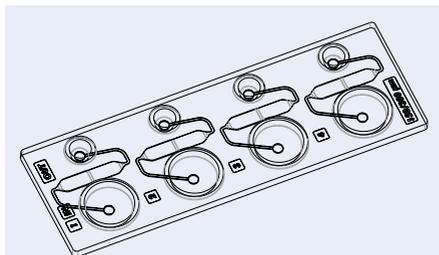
Schematic drawing of cuvette tank chip – Fluidic 553
